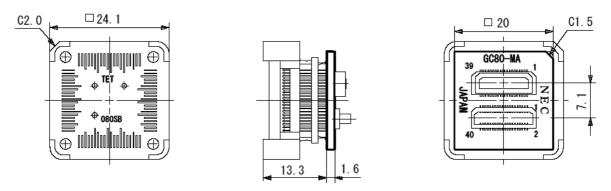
Mount Adapter for V850E/IA3 (80-Pin GC Package)
